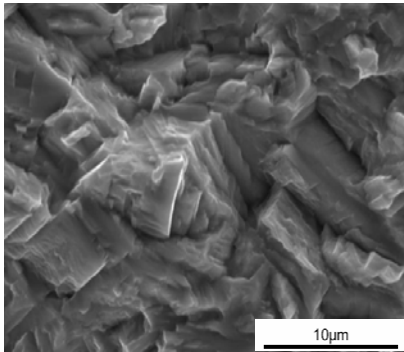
Fatigue fracture surface for case of surface initiated fracture
